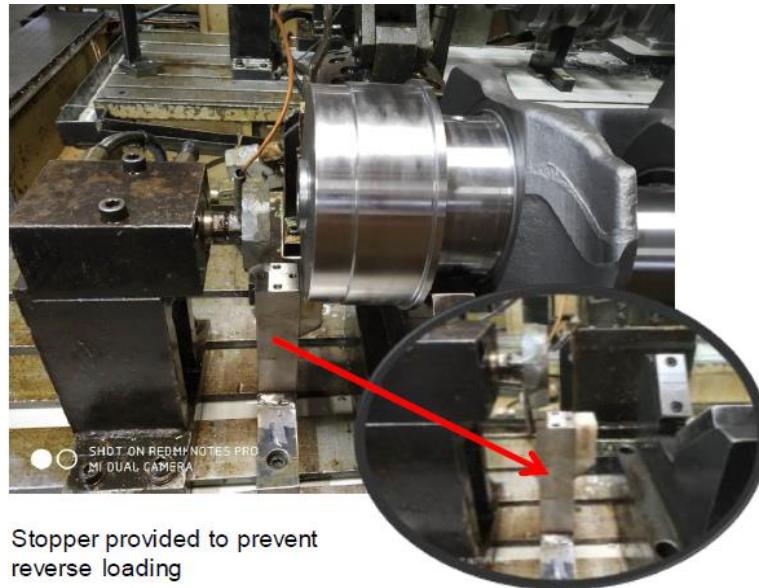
After Introducing Poka Yoke onthe Flange Hole Drilling Process.
